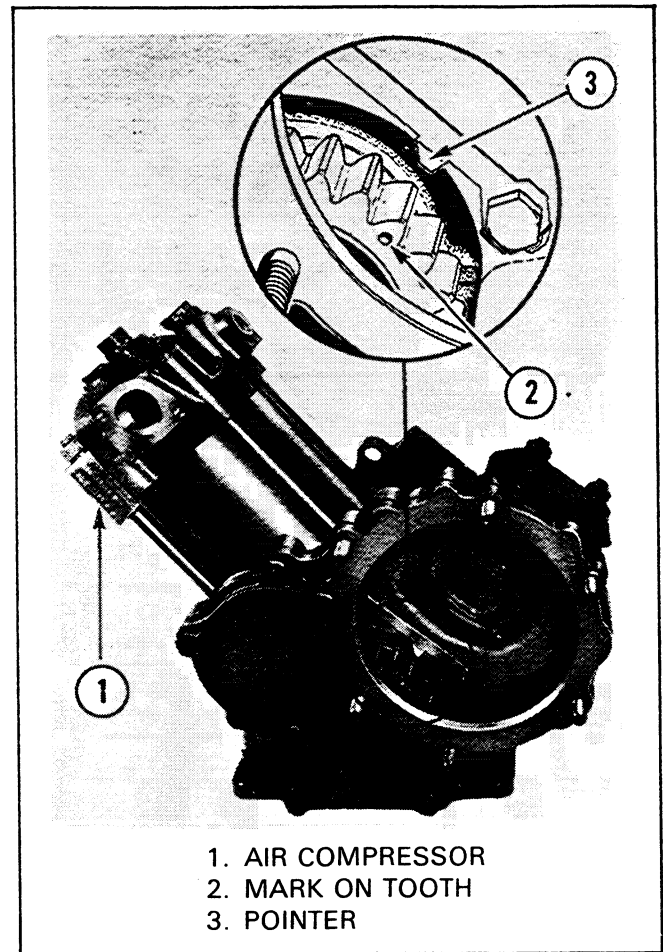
INSTALLING THE AIR COMPRESSOR
